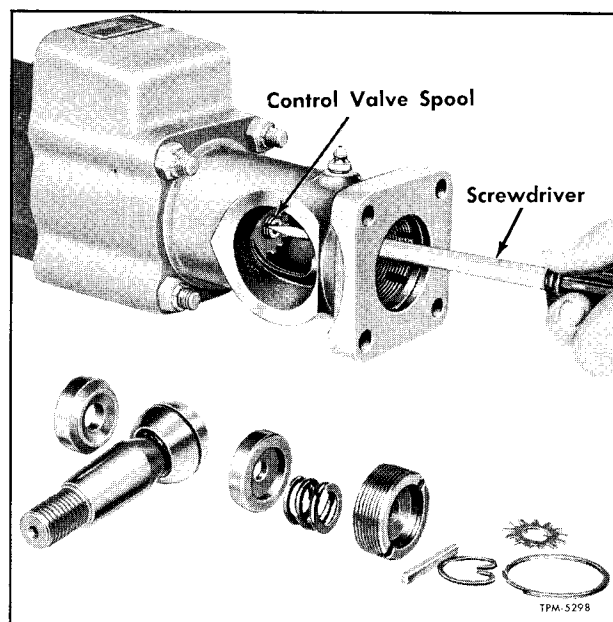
Adjusting Booster Cylinder Control Valve Spool
